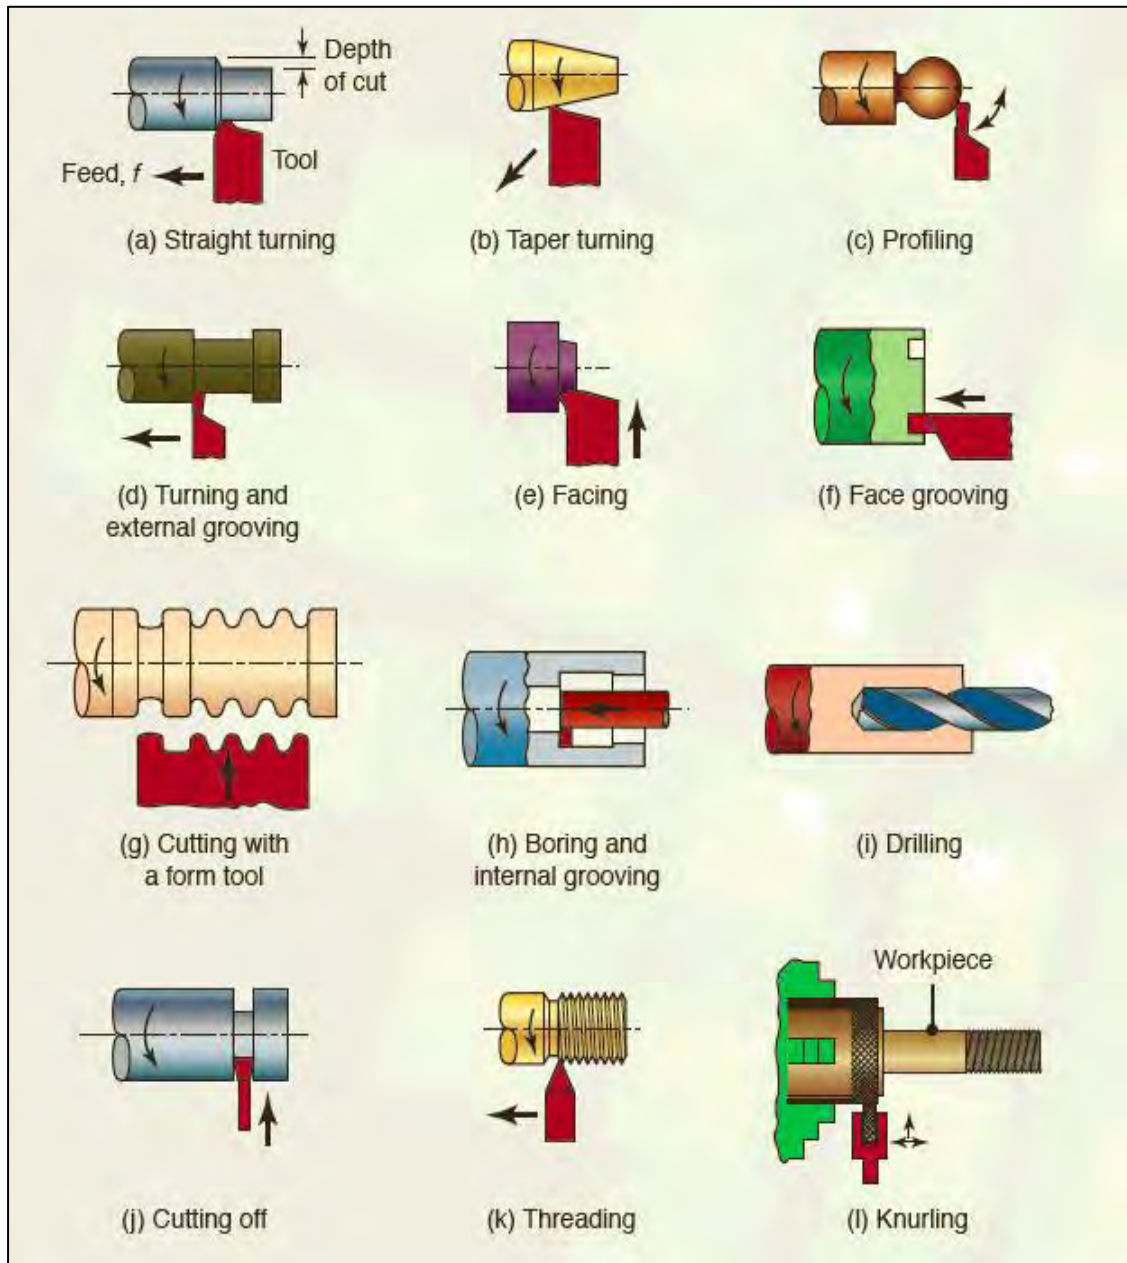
2 Several Cutting Operation Perform on Lathe Machine (Kalpakjian and Schmid, 2013)
